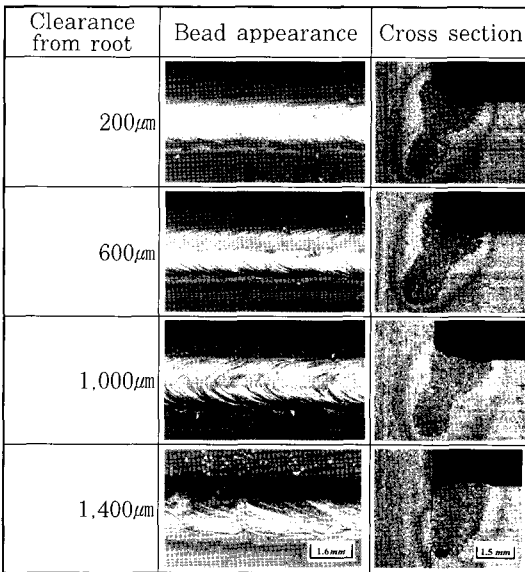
Penetration shape and bead appearance according to clearance from fillet root in laser welding
